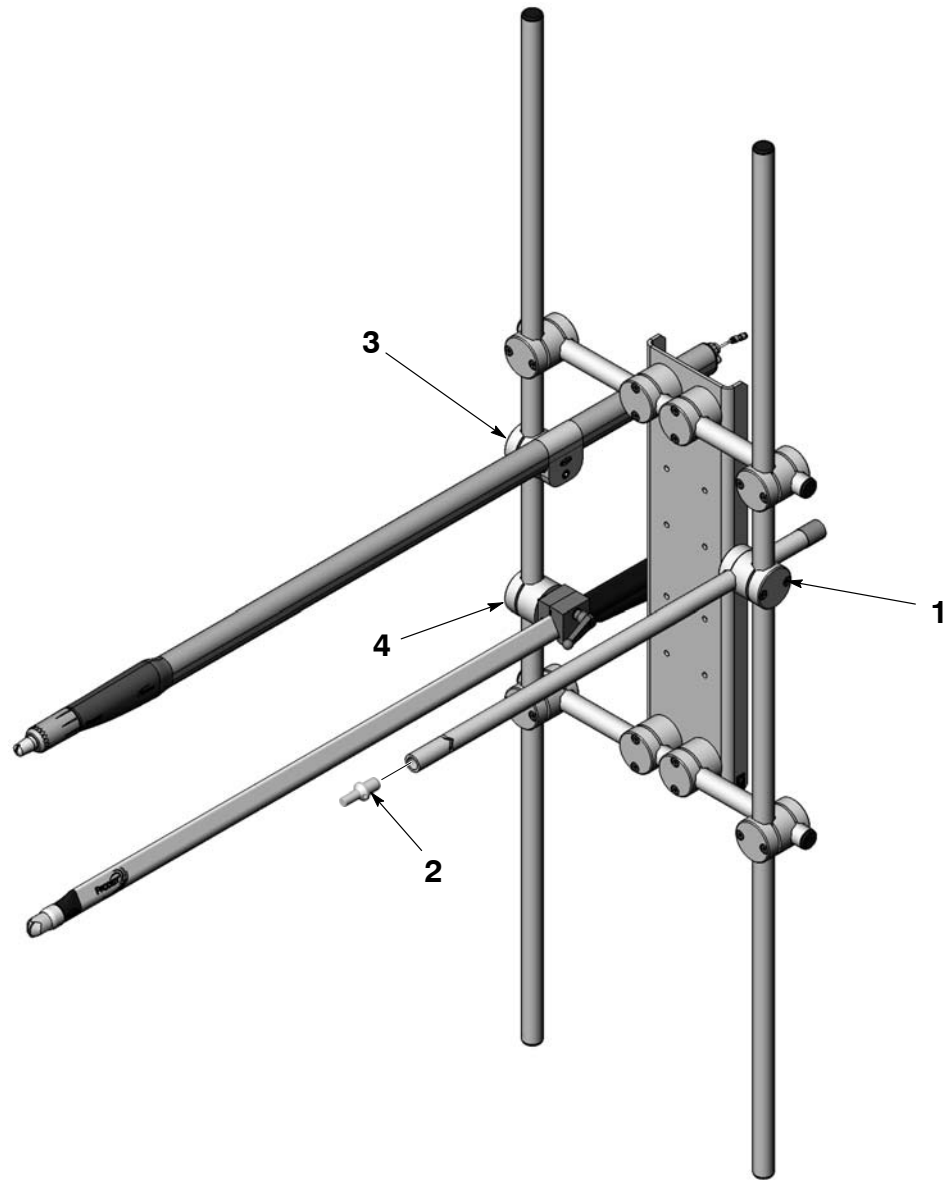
Bar-Mount and Horizontal Gun Mount Kits
